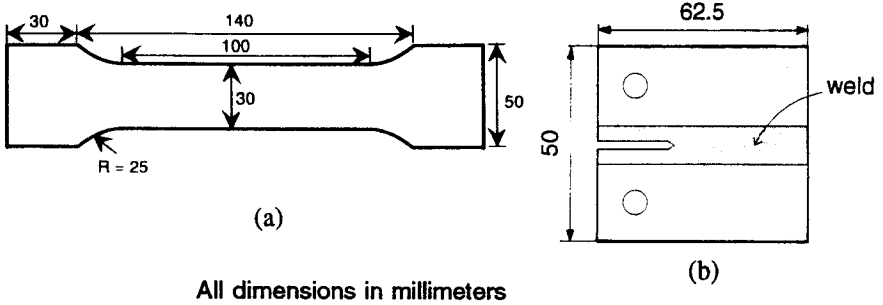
Geometry of fatigue test specimens; a) S-N test specimen; b) ASTM crack growth specimen.
